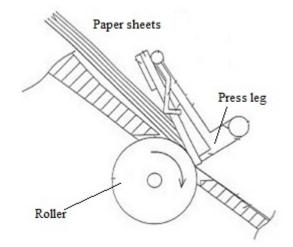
Structure of sheet by sheet paper feeding [17]
